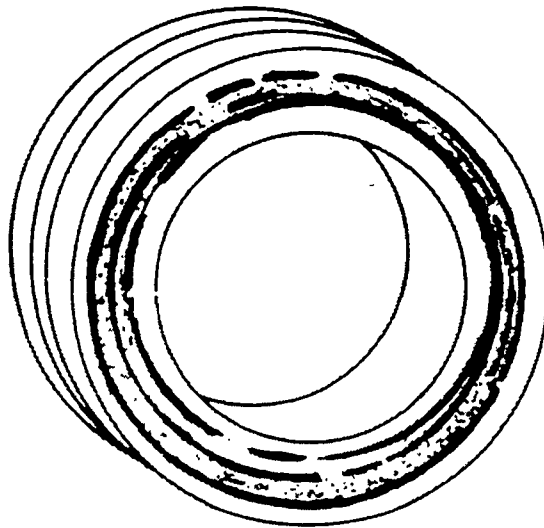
Deep Wear in Hard Seal Face¹⁶
